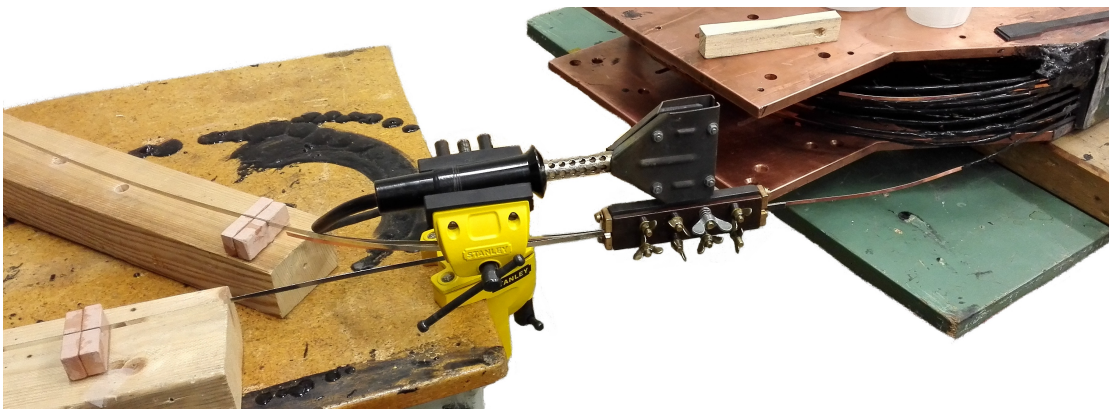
Soldering of BSCCO HTS wire at the end of the field winding
